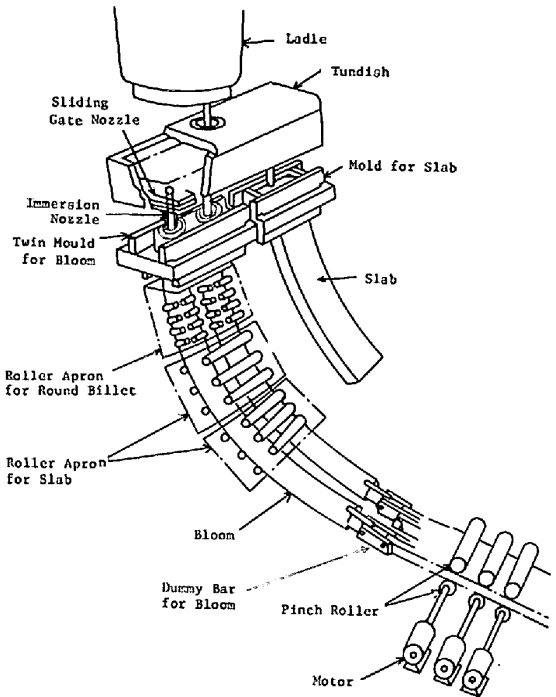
Illustration of Twin Casting Process of Round Billet in a Strand of Existing Slab Caster.
